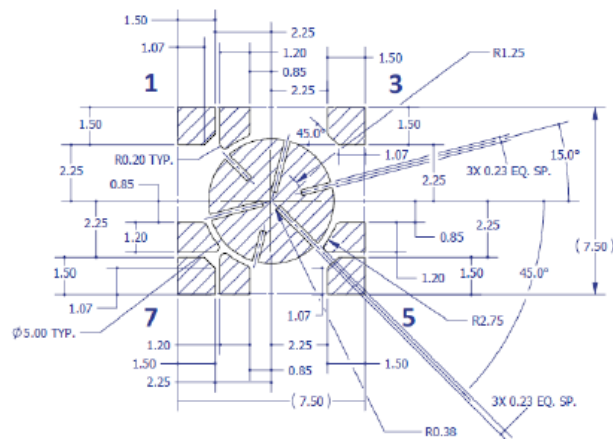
Recommended solder pad layout for anode, cathode, and thermal pad.
